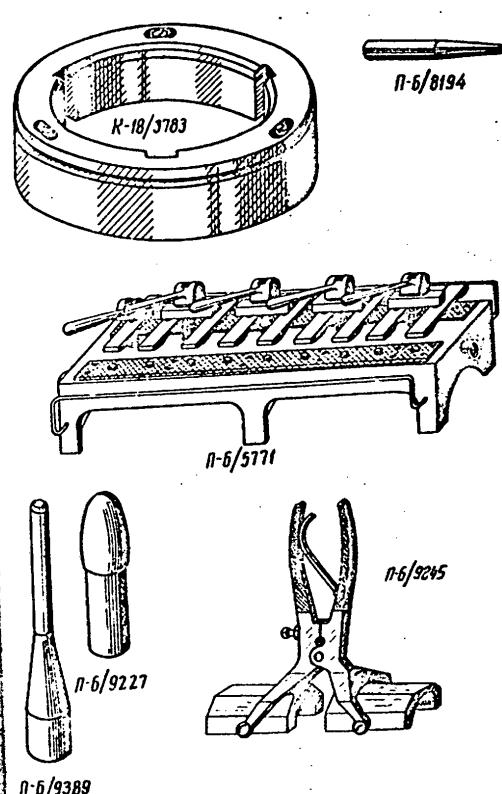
TOOLS AND FIXTURES FOR CYLINDER ASSEMBLY
